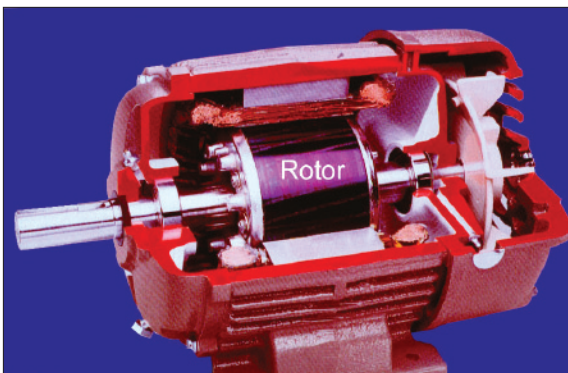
Exploded view of typical induction motor. The die cast aluminum end ring with cast fan blades is visible on the rotor. The multiple conductor bars connecting the end rings are contained within the iron laminations.
